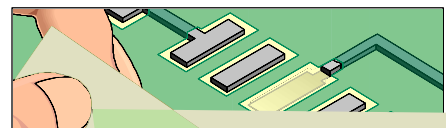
Place the new surface mount pad in place using High Temperature Tape.
